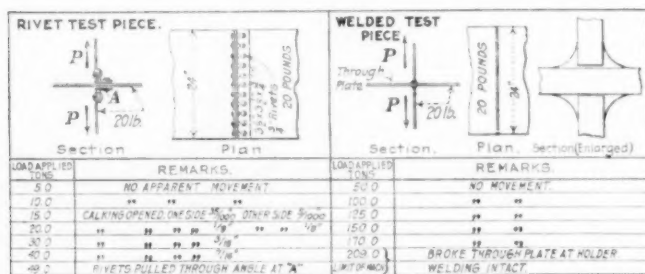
COMPARATIVE TESTS ON BEARING STRENGTH OF WELDED AND RIVETED LUG ATTACHMENT
